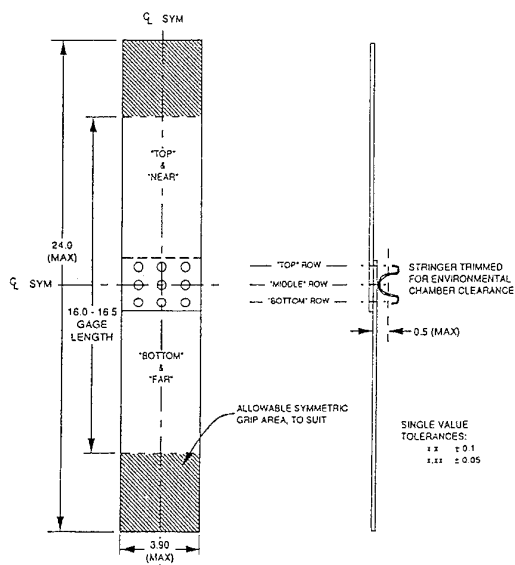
Typical Fuselage Lap Joint Test Coupon
